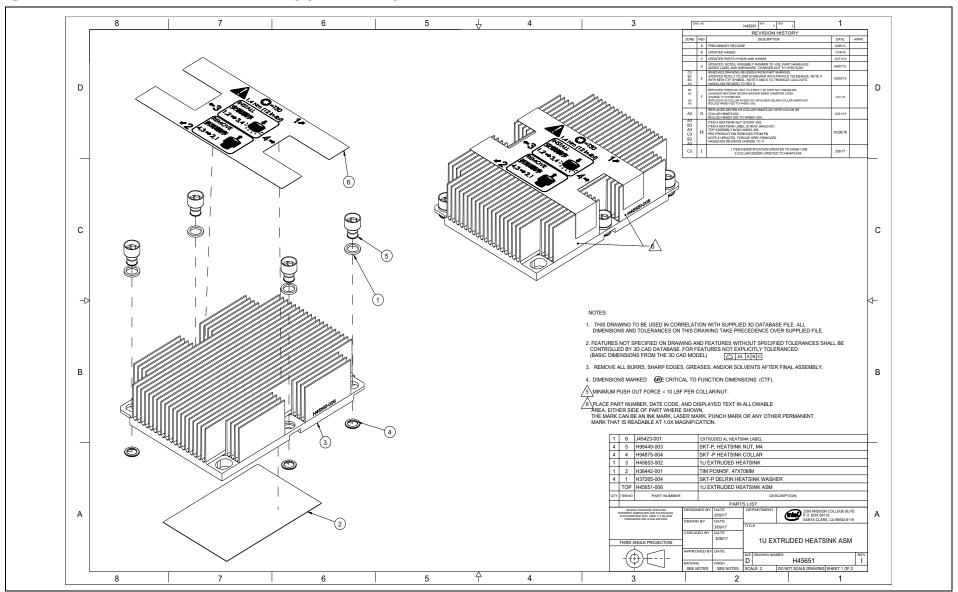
1U Extruded Heatsink Assembly (Sheet 2 of 2)
